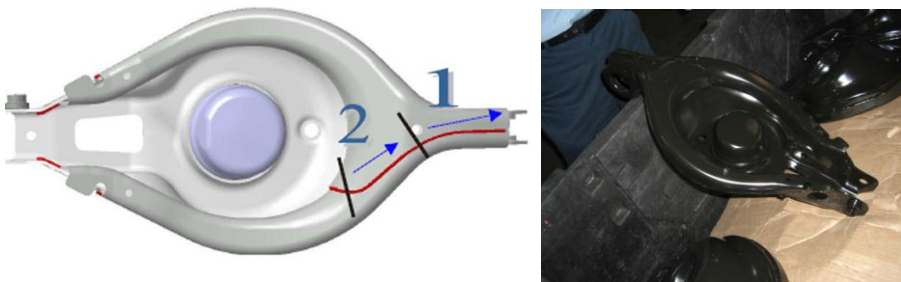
Welded assembly of sheet metal formed parts in the automotive industry
